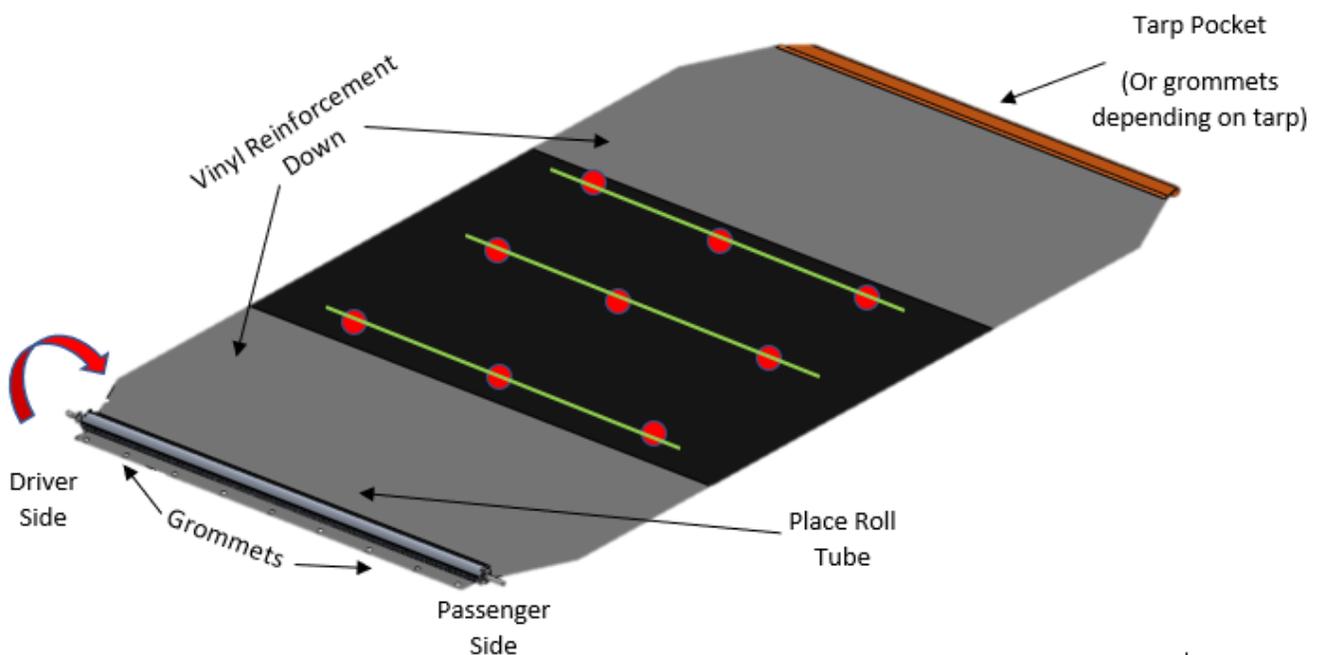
Assembling Replacement Tarp onto Roller Tube
